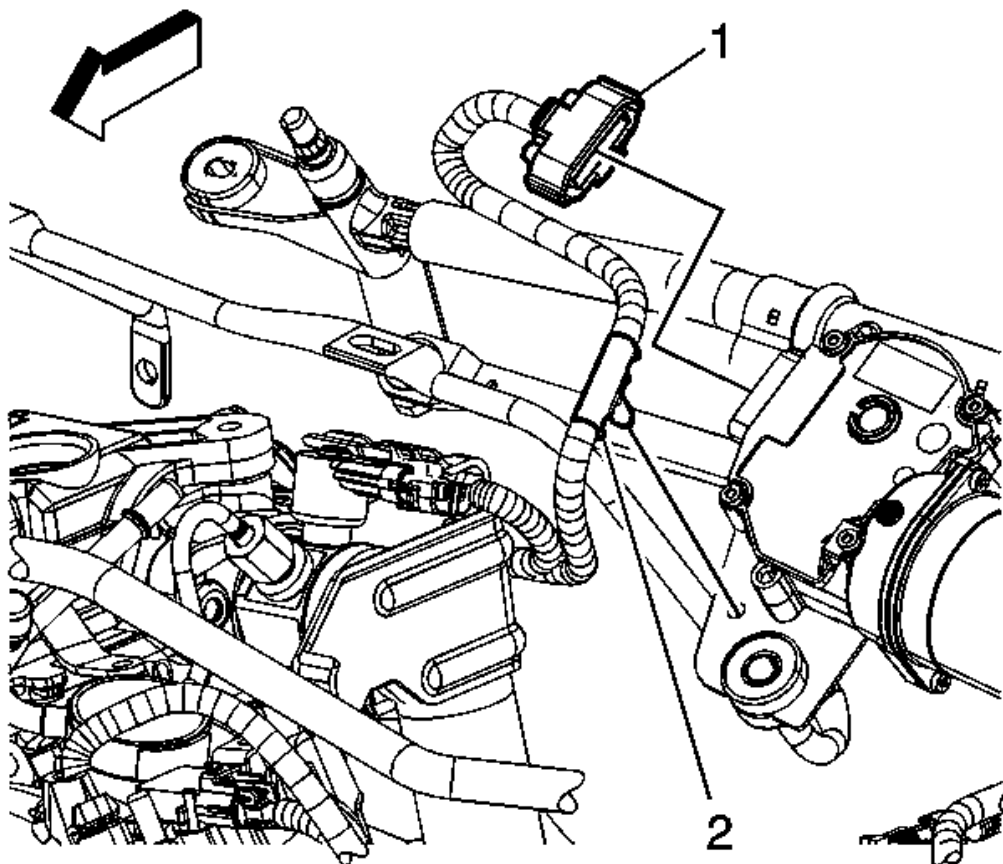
Locating Windshield Wiper Motor Electrical Connector & Harness Clip
